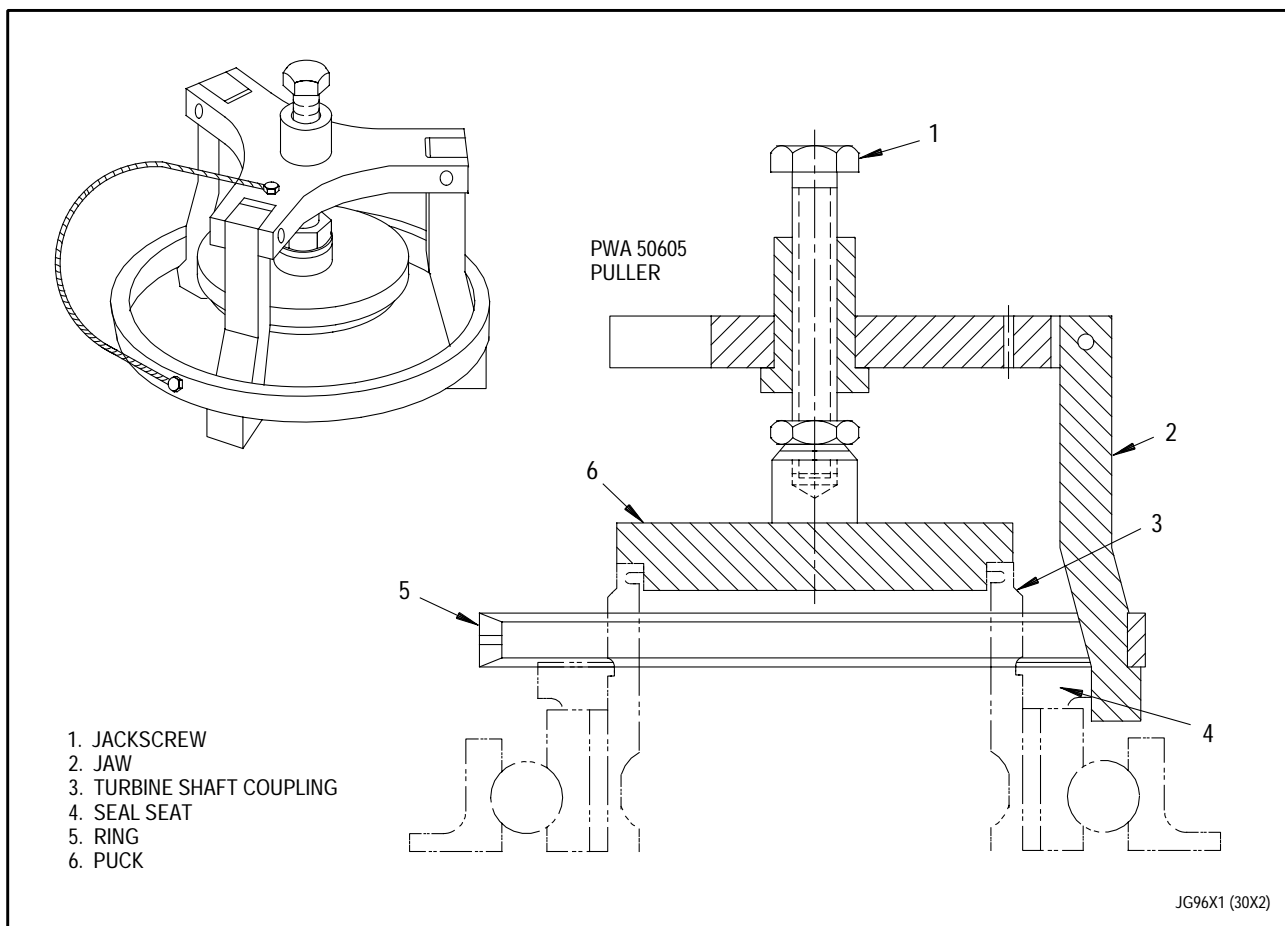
No. 2 Bearing Seal Seat - Removal with PWA 50605 Puller
